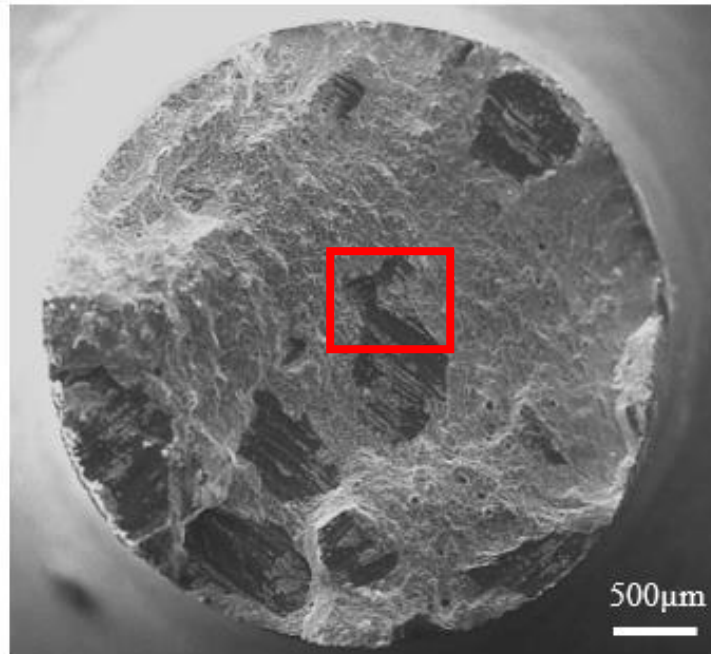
SEM images of 30T tension test specimen fracture surface
